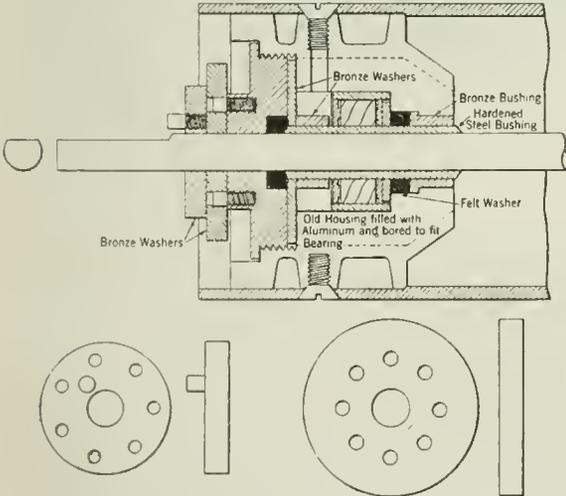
Original Pantograph Roller Housing Modified and Fitted with Roller Bearing
